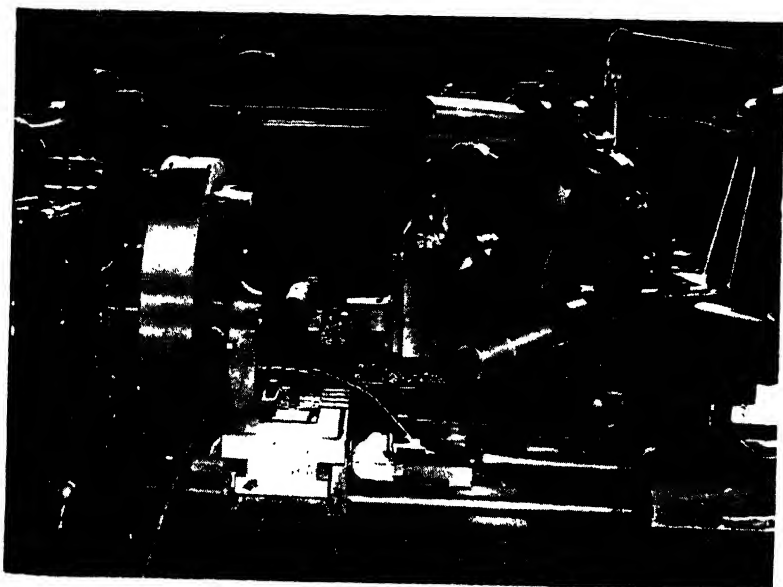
Roughing a Steel Crankcase for Airplane Engine
